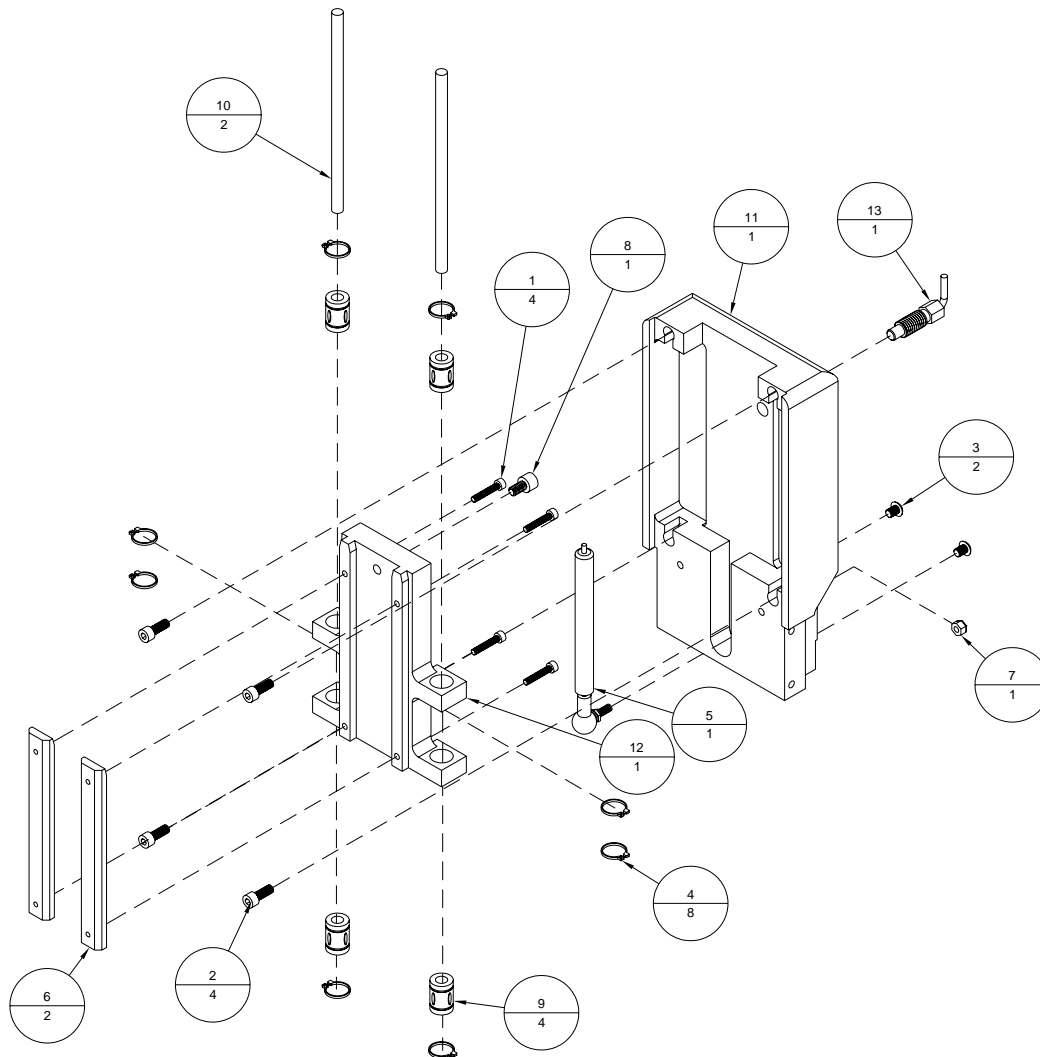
Printhead Support Assembly, Solid (9102595A)
